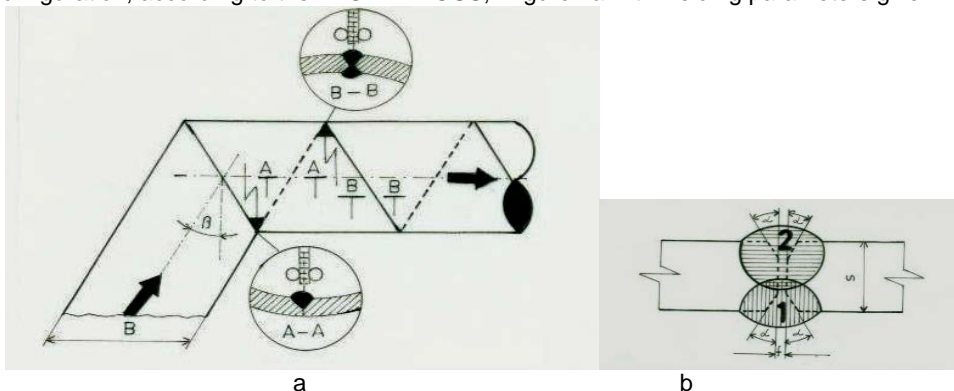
Double sided submerged arc welding of spiral line pipes
